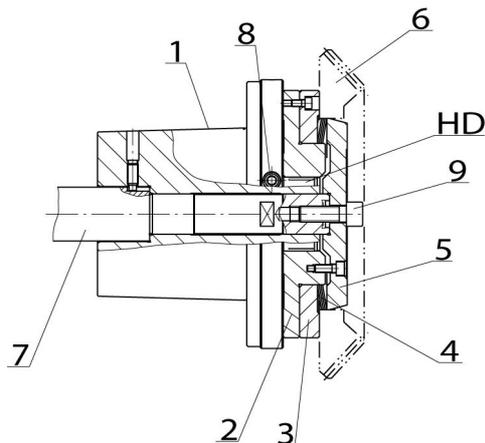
Clamping mandrel for lapping and testing automotive spur gears
